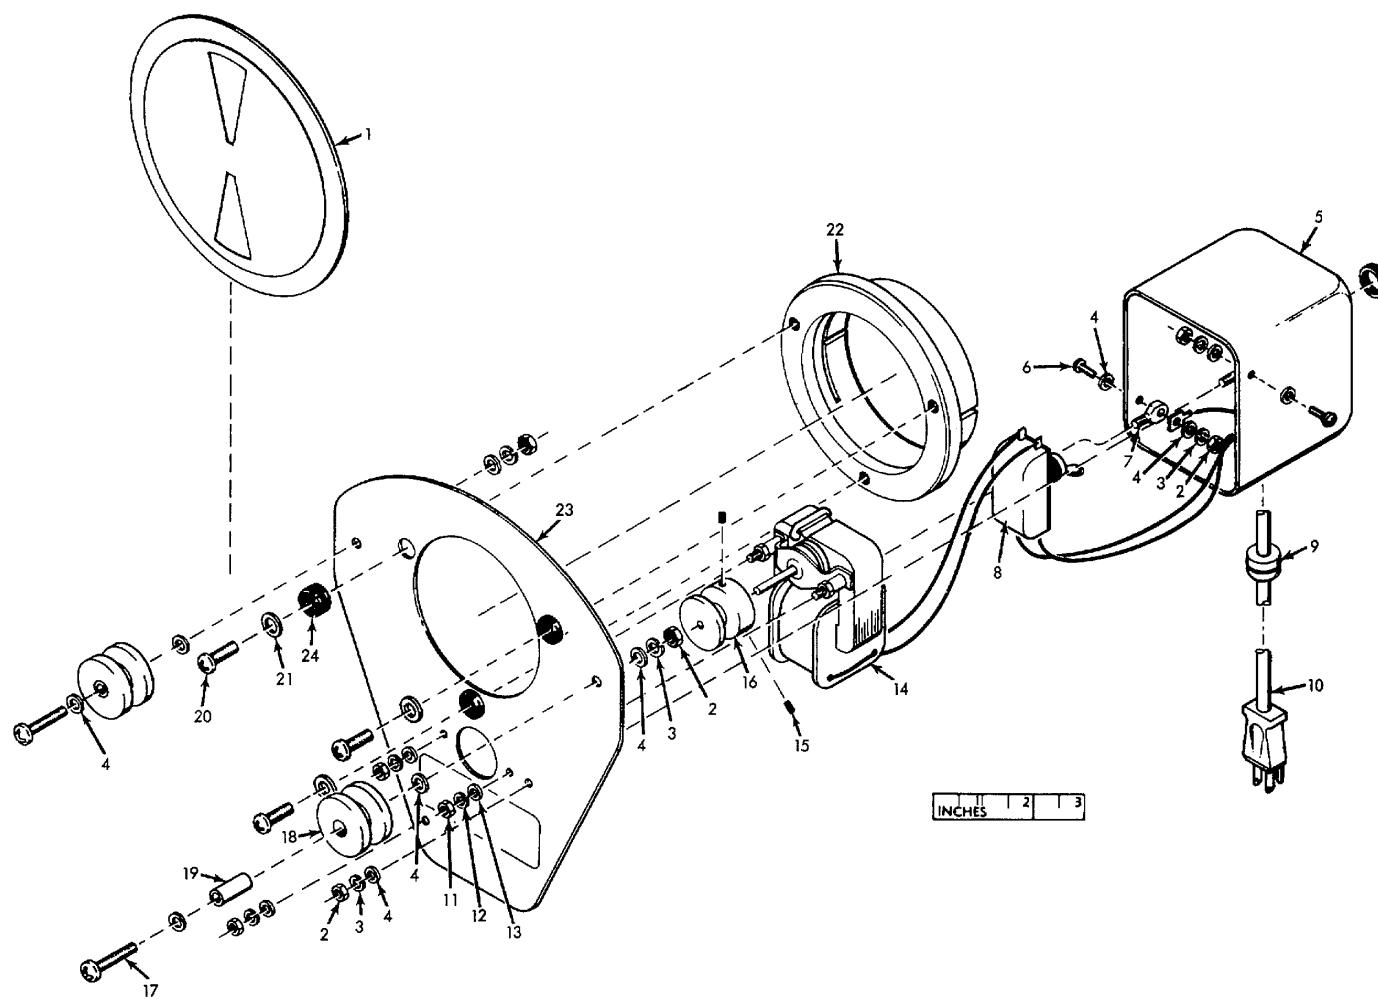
Disassembly of radiant energy attenuator-7924452-exploded view.
